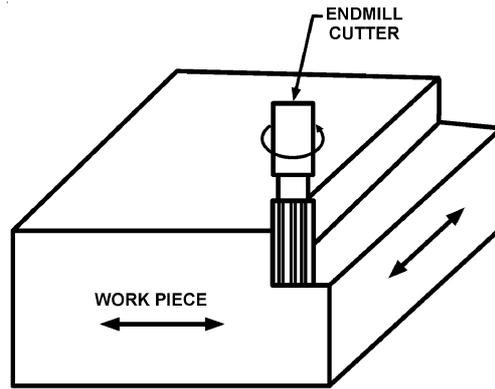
, Producing a single flat surface by using an End mill cutter.
